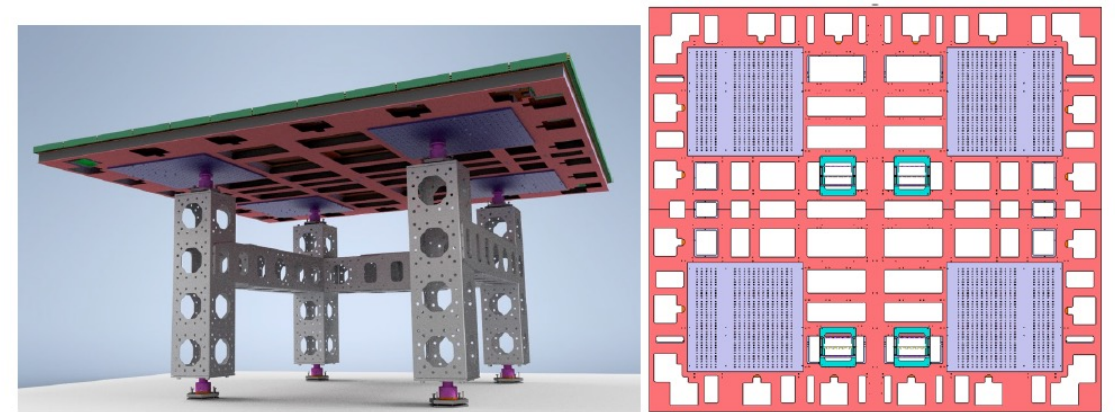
Left: Truss system with a bottom CRP sitting on it for cabling of the CE to the CRP patch panels. Right: Bottom view of the CRP showing the position of the four patch panels in blue.
